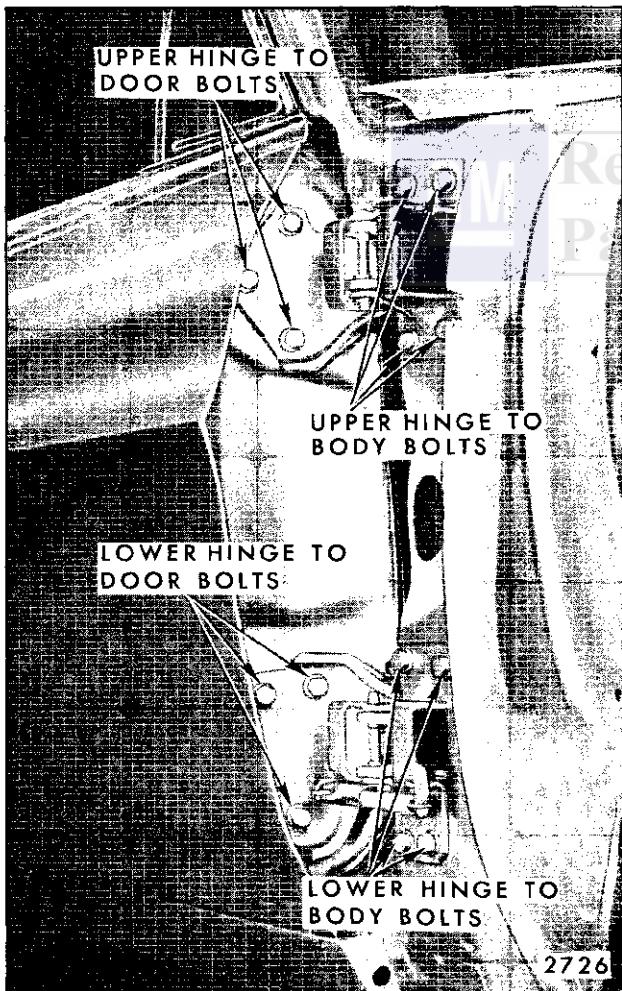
Front Door Hinge Attachment - "B-C & E" Styles
